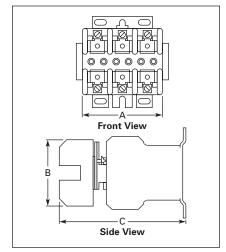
3-Pole Fuse Block and Contactor Dimensions
